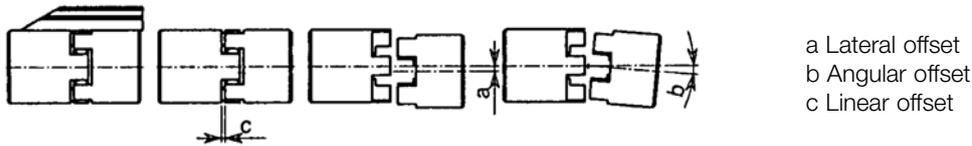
Measuring points for tolerances of the coupling alignment
